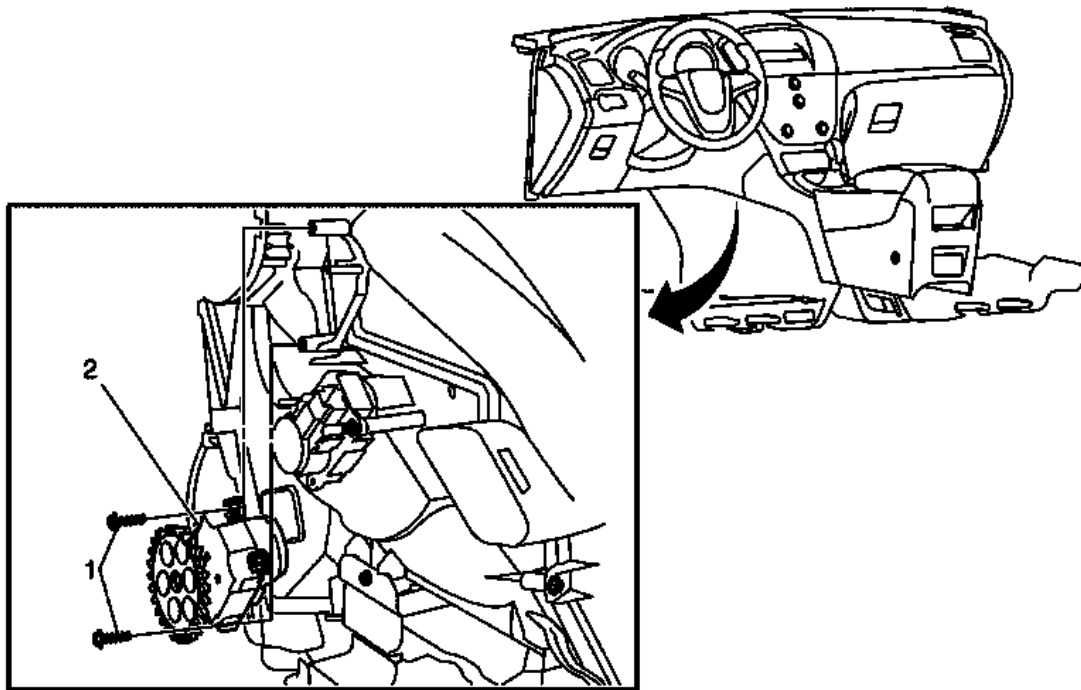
Mode Control Cam Actuator & Fasteners (Left Hand Drive)
